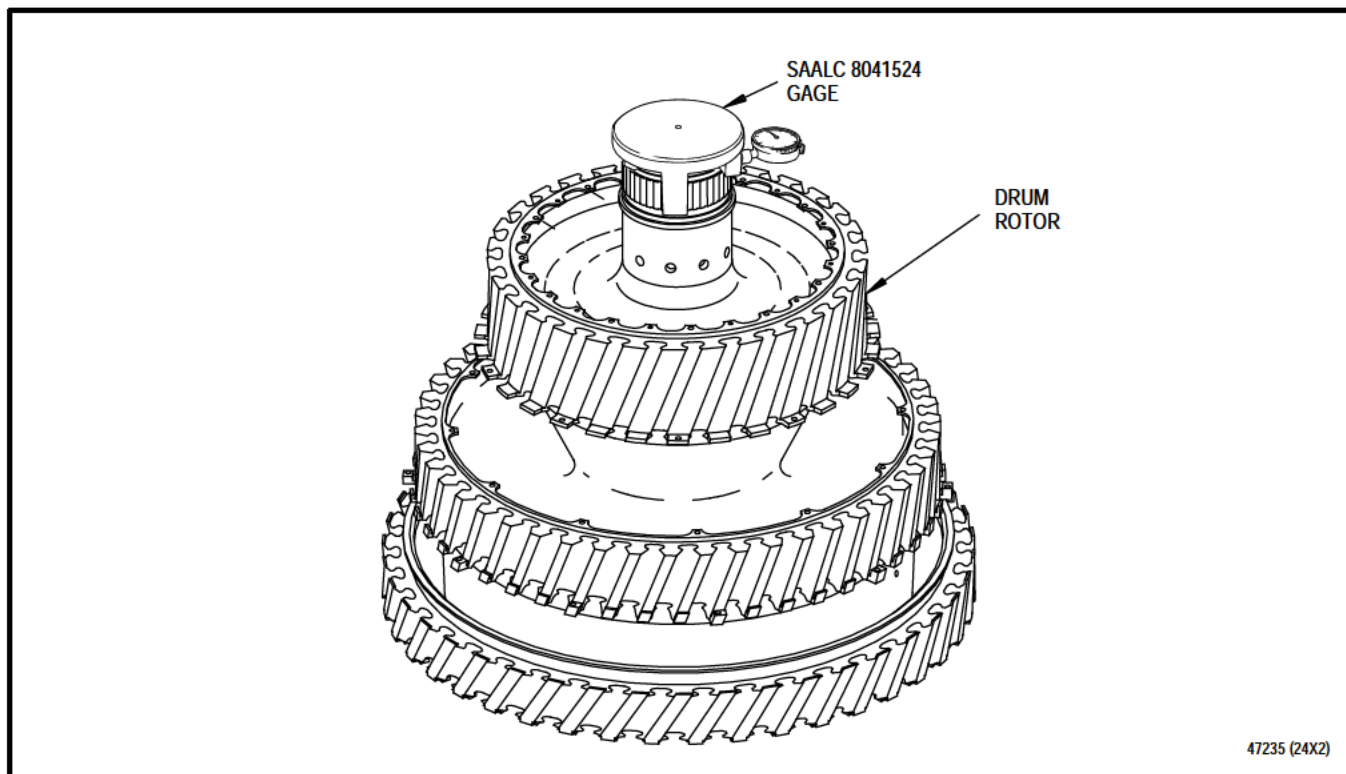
Front Compressor Drum Rotor Disk Assembly-Diameter A Measurement
